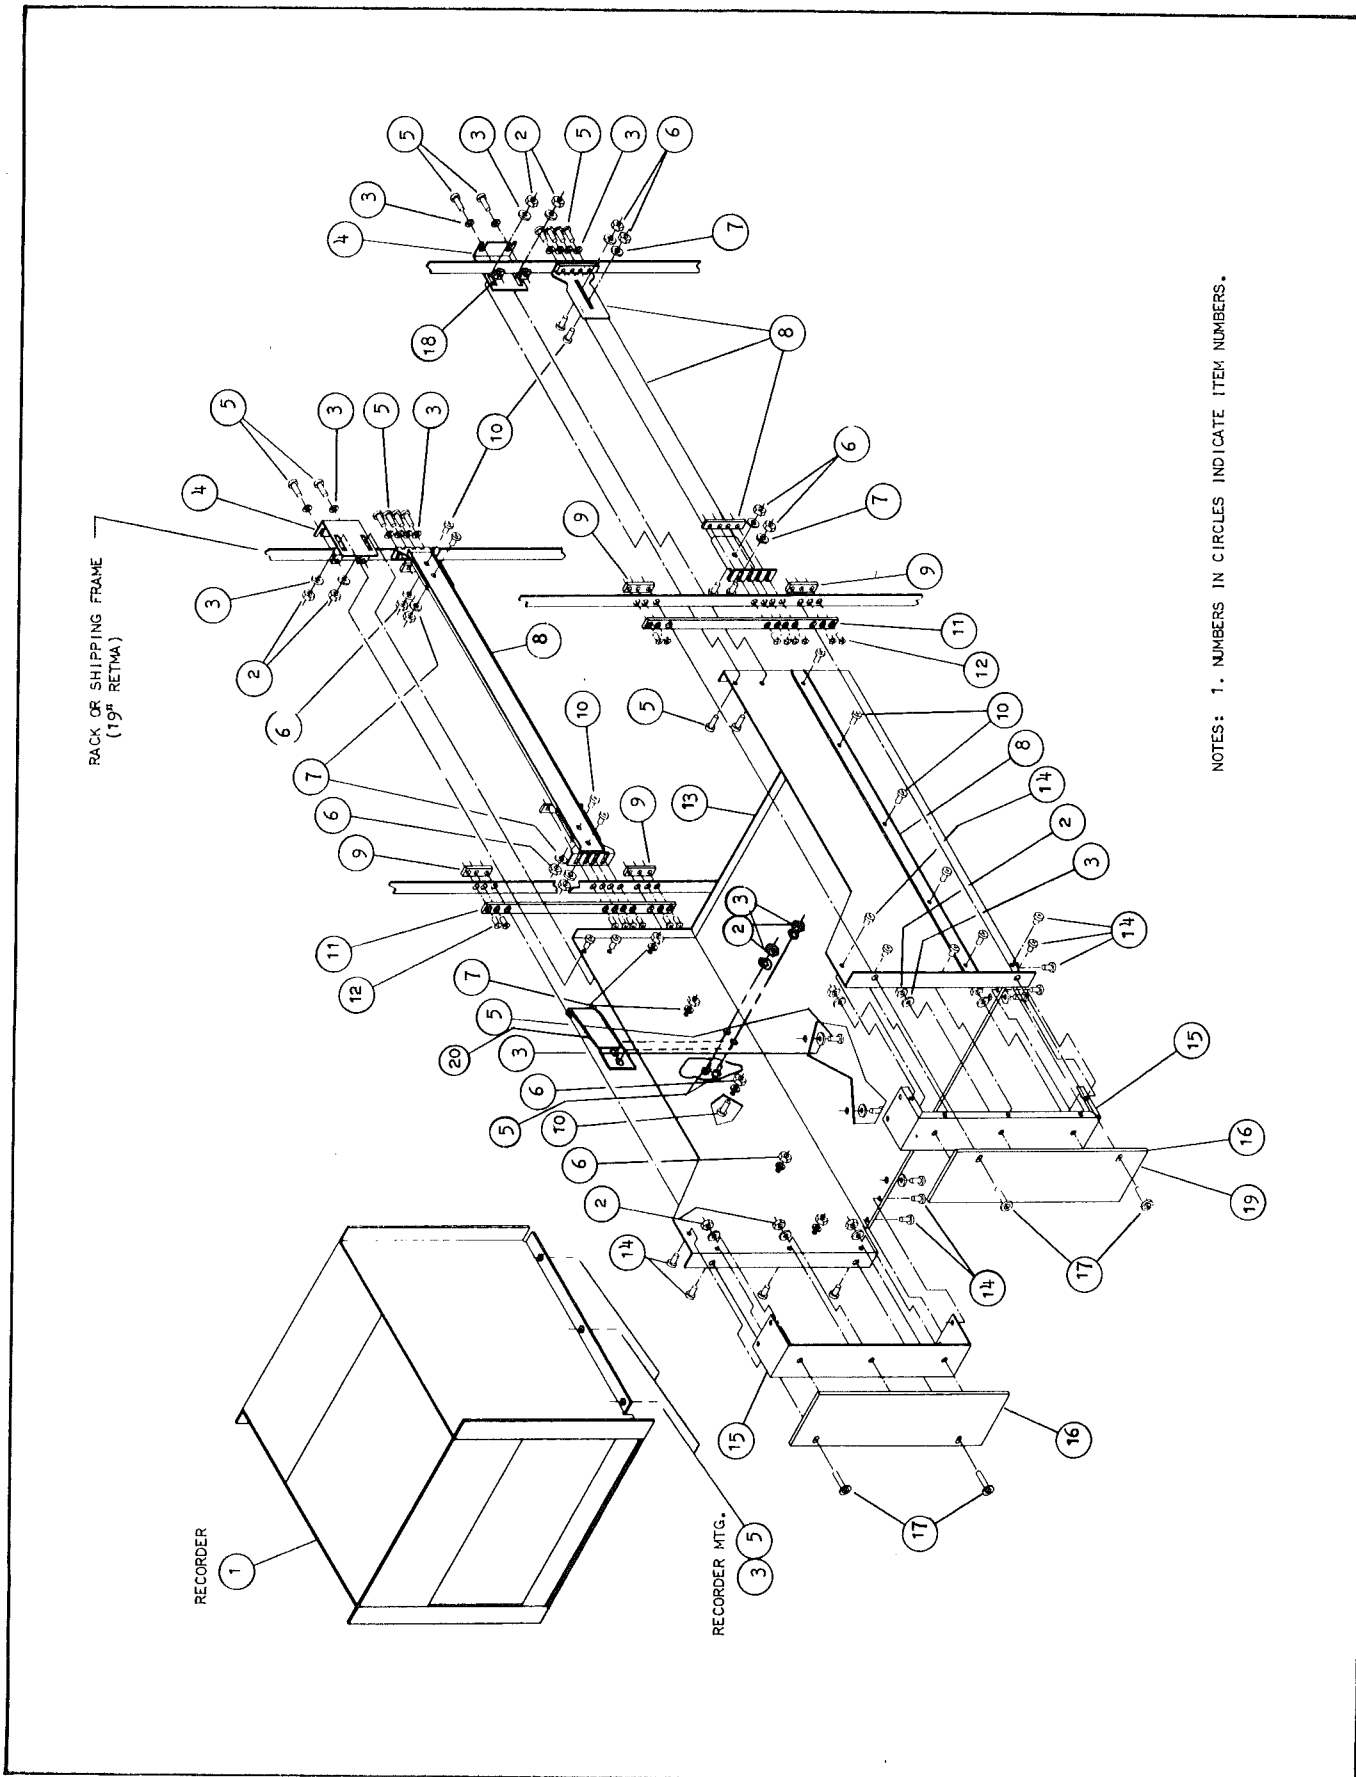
RACK MOUNT INSTALLATION, RECORDER ONLY
